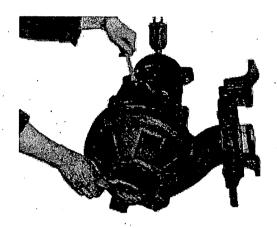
Setting impeller clearance using the set screws and feeler gages.
